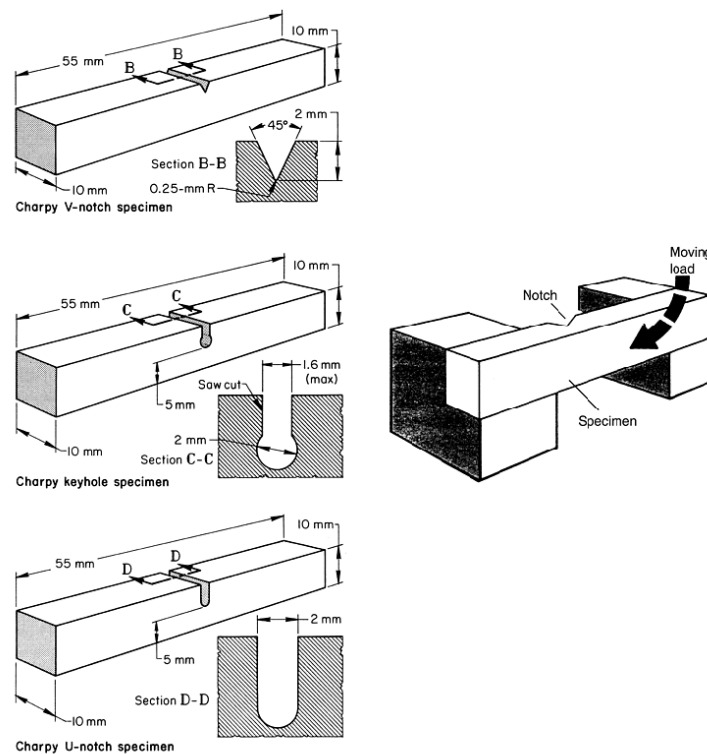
Standard specimen dimensions and direction of impact force of Charpy test [6]
